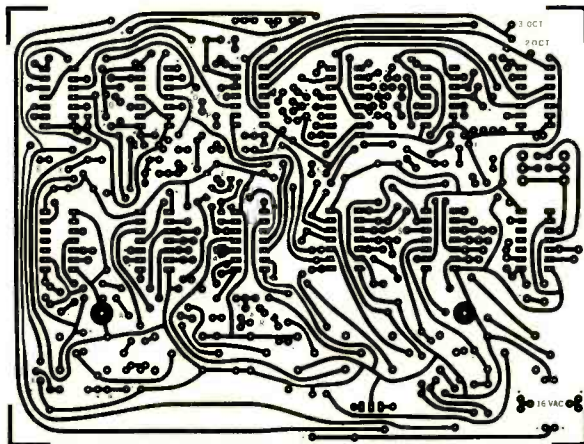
FOIL PATTERN of single-sided PC board shown half-size.
